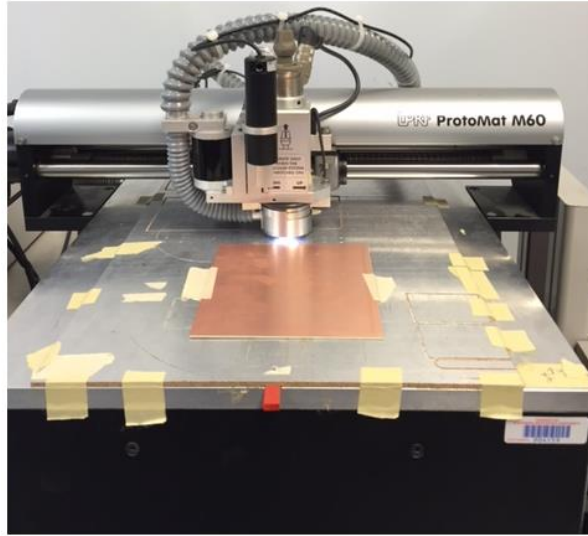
The LPKF ProtoMat M60 milling machine in antenna fabrication lab.
